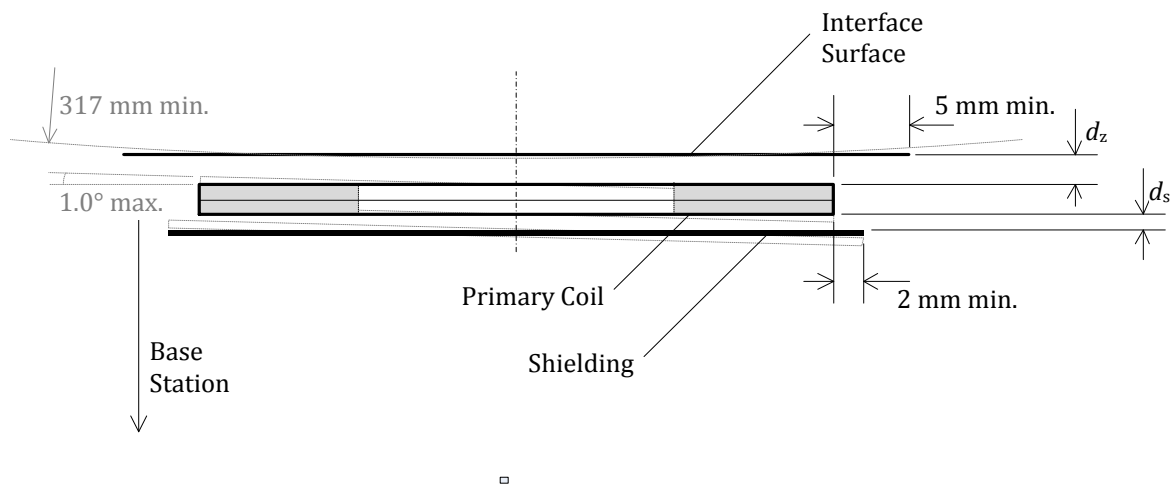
Primary Coil assembly of Power Transmitter design A17
